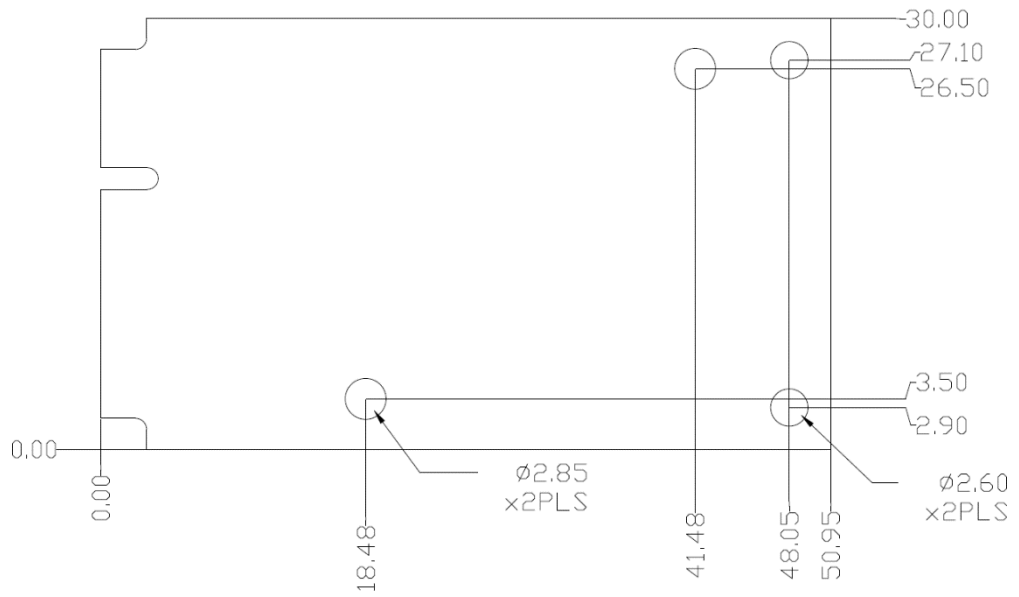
HMP1RB1C2GA Mechanical Outline – Top View (dimensions in millimeters)
